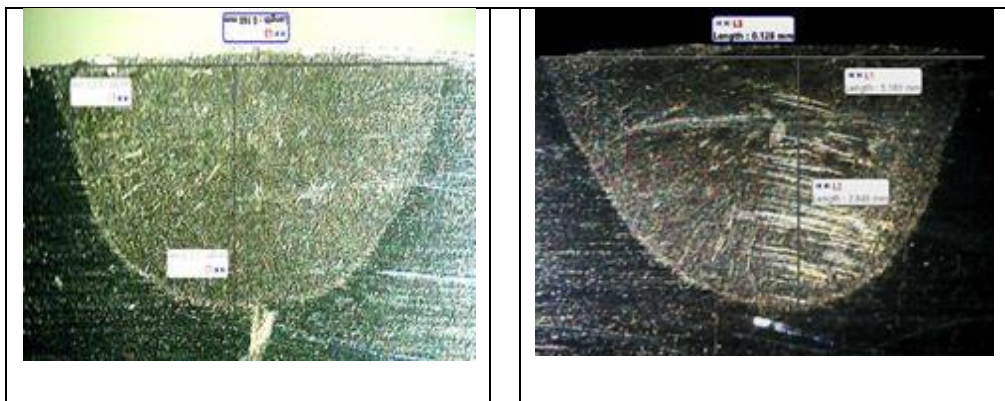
View of weld bead of Serial No. 22 (a) 1st pass and (b) 2nd Pass done on two sides
